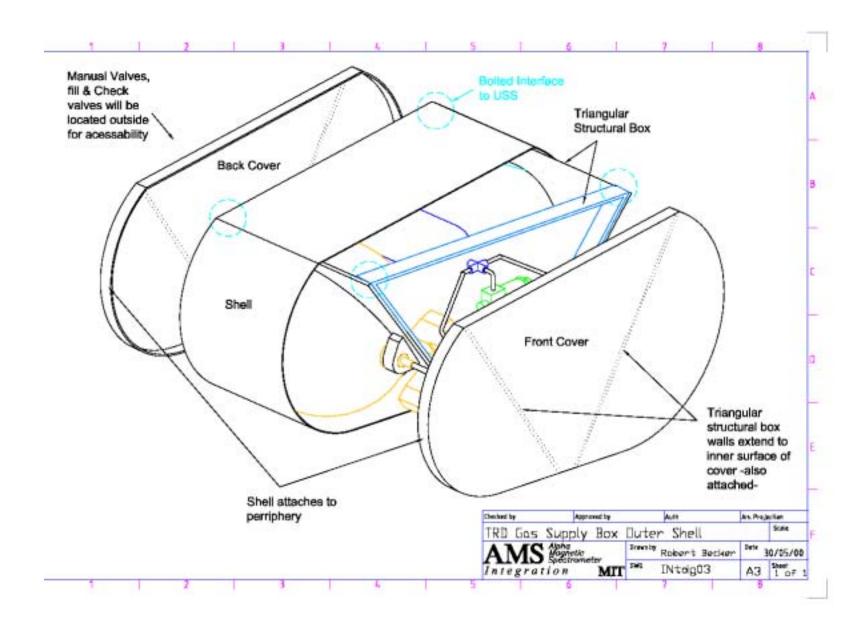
TRD Gas Supply Assembly With Covers
